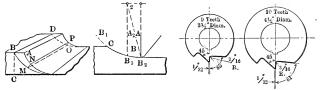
Chip As- Fig. 2.—Action sumed to be produced by Cutter without distortion
